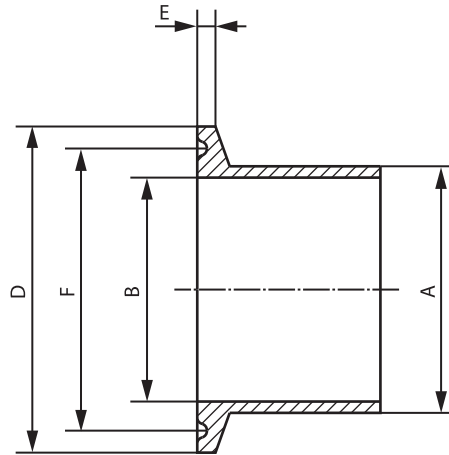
Sectional drawing of a clamp fitting acc. to ASME BPE -BO
